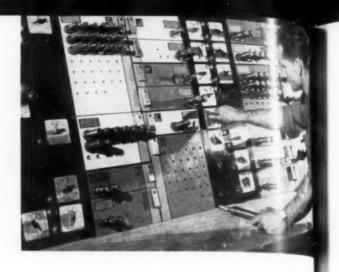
(right) Tool control board in Ford's Cleveland engine plant stores tools and records life of tools in operation, providing a method of handling preventive maintenance in keeping with new equipment.
